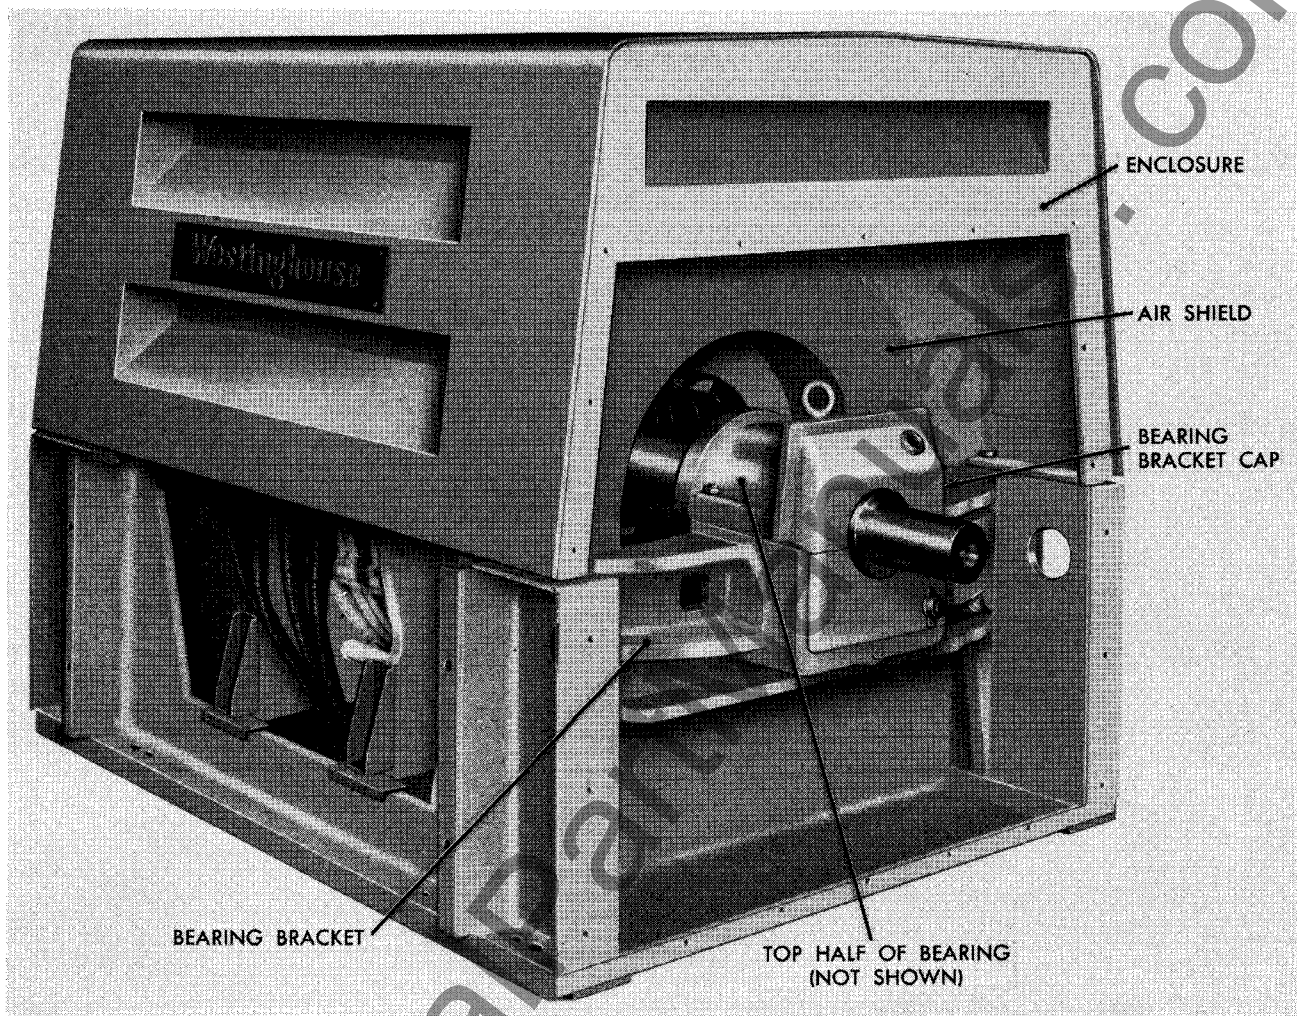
F/A Motor Showing Power Leads and Bearing Assembly
